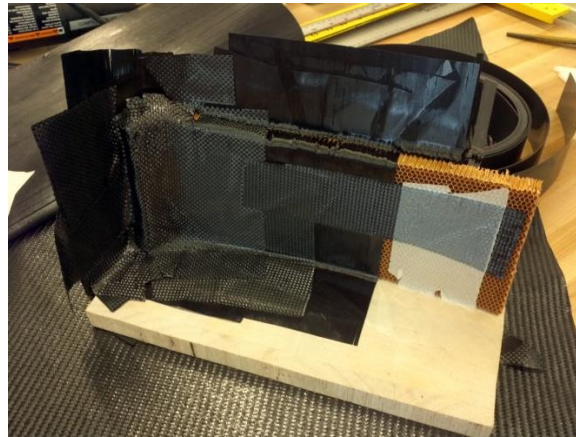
The completed front bulkhead plug glued into the mold with the silicone fillet applied.
